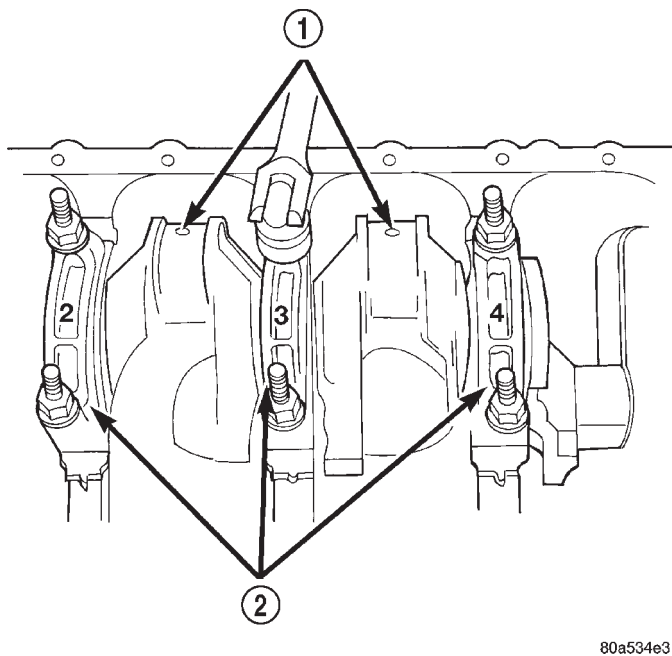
Removing Main Bearing Caps and Lower Inserts
